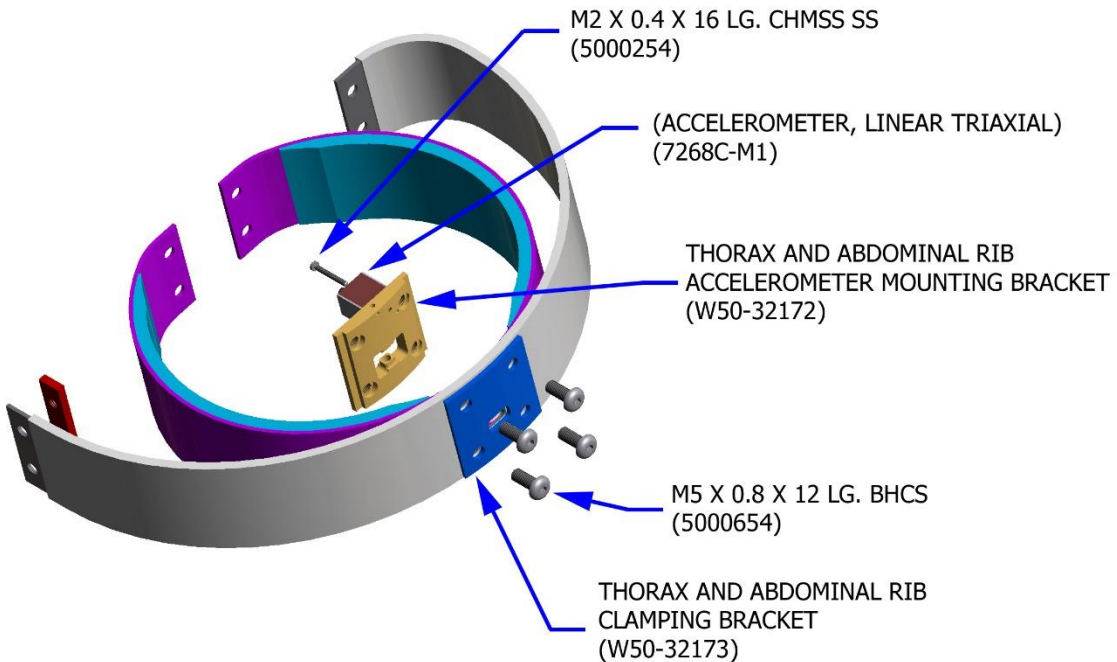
Assembling the thorax and abdominal rib clamping bracket.
